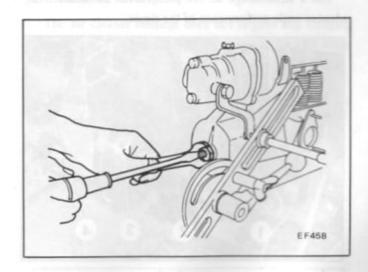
Adjusting high-speed control (Mechanical governor section)
